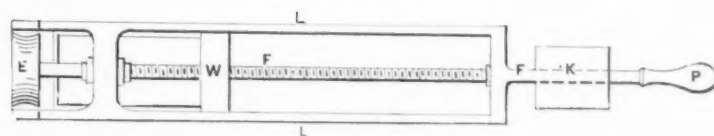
Top View of Brake Lever shown in Fig. 1.
